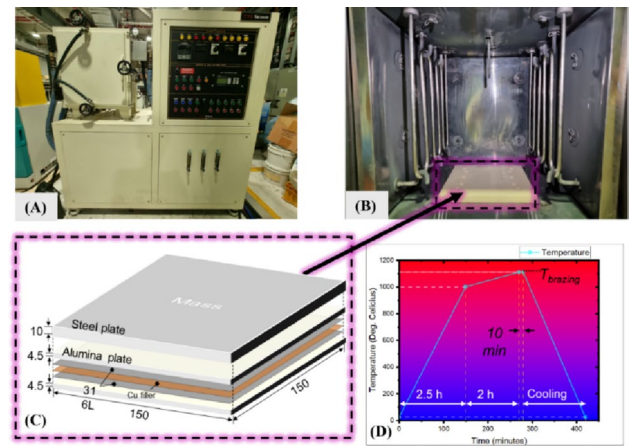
Brazing procedure: (a) vacuum brazing machine, (b) chamber interior, (c) specimen stacking configuration with alumina plates and steel mass, and (d) temperature control profile
